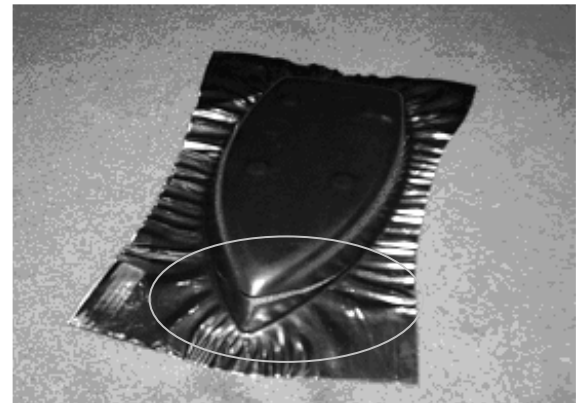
Example-piece stamped in AISI 430-E2 stainless steel sheet.
